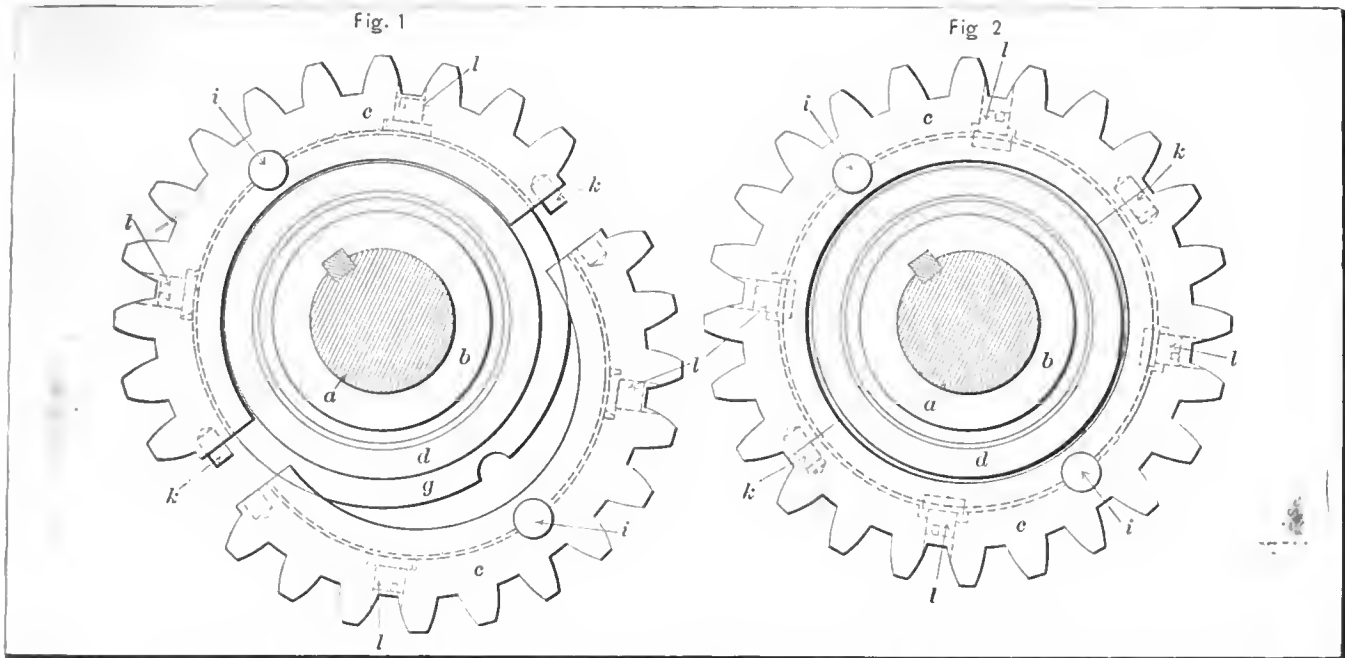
Showing two sections of a gear made with the Sparr locking device, one half-gear being partly removed. Fig. 2—View of gear with Sparr device assembled and locked ready for use. *l, l* are the locking screws, *l, l* are the locking pins, and *k, k* the dowel pins
